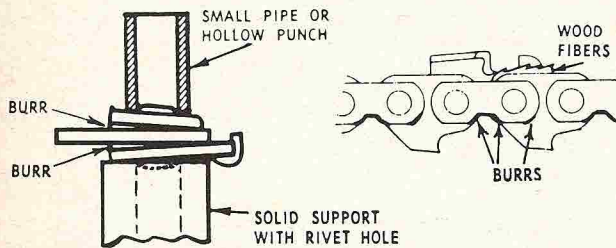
Relieve tight joints by removing burrs and wood fibers.
